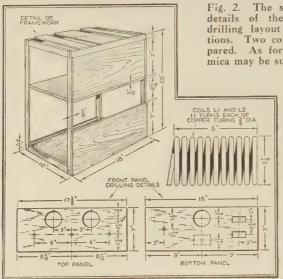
The sketch to the left shows the details of the frame construction panel, drilling layout and coil winding specifications. Two coils, as shown, should be prepared. As for the panels, bakelite or formica may be substituted for wood, if desired
